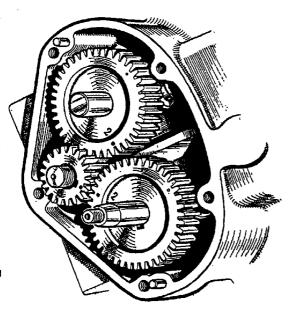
Valve-timing Markings for 1949-51 Engines.
